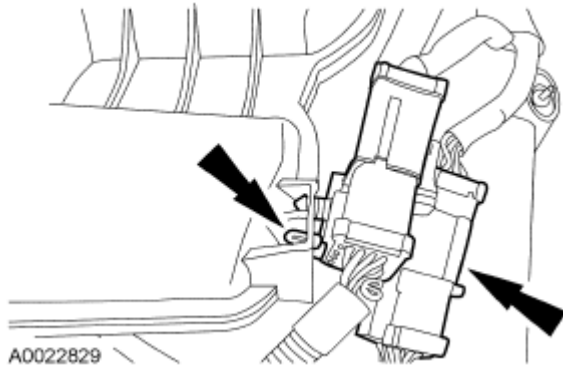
Locating Engine Control Sensor Wiring Connectors
